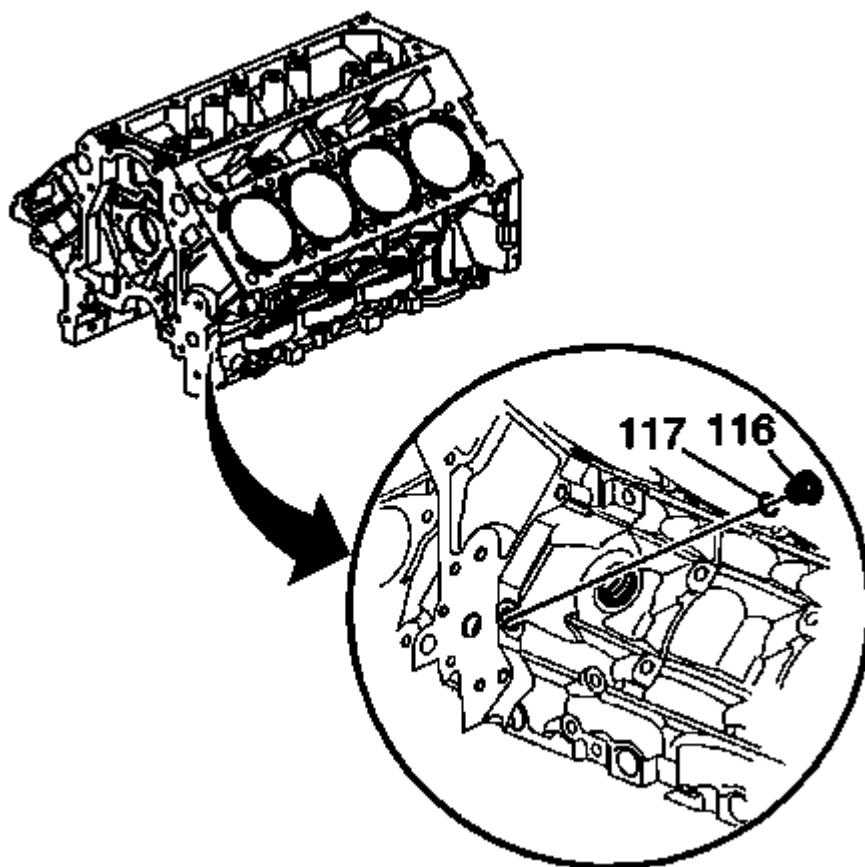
Engine Block Left Front Oil Gallery Plug & Seal
